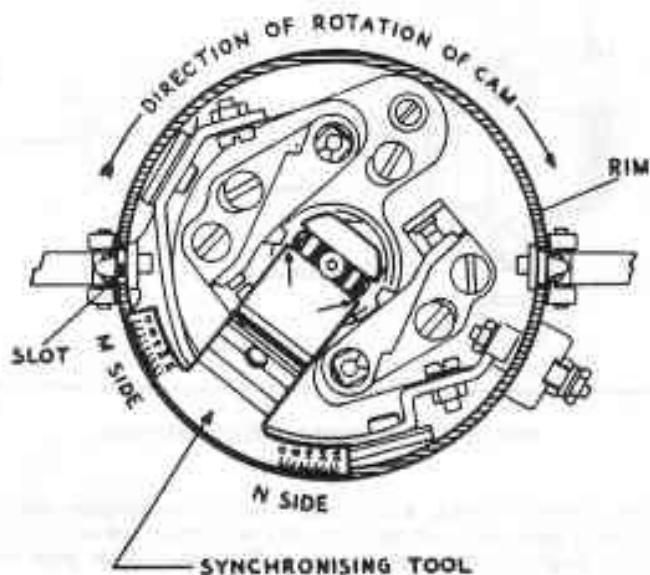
SYNCHRONIZING TOOL IN POSITION.
